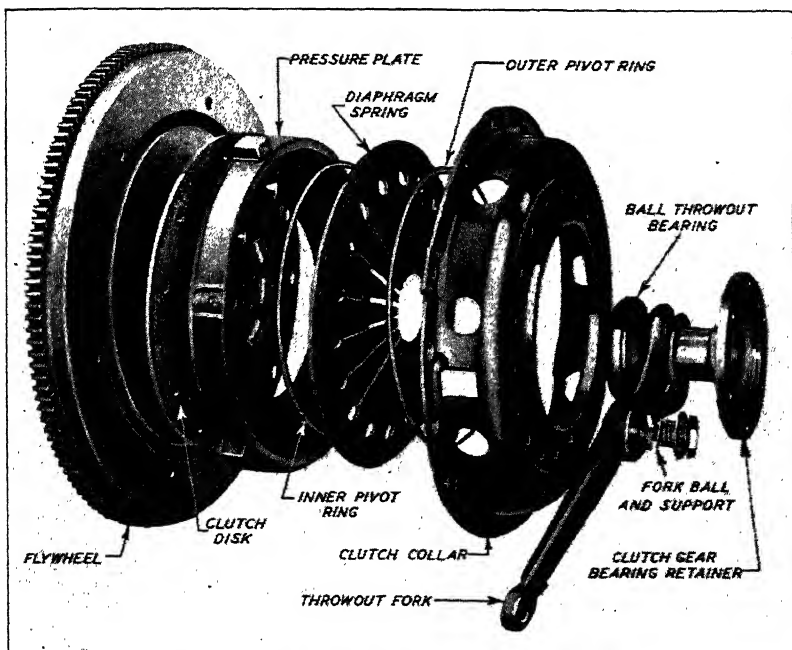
1938 Chevrolet Clutch Showing Parts Assembled
